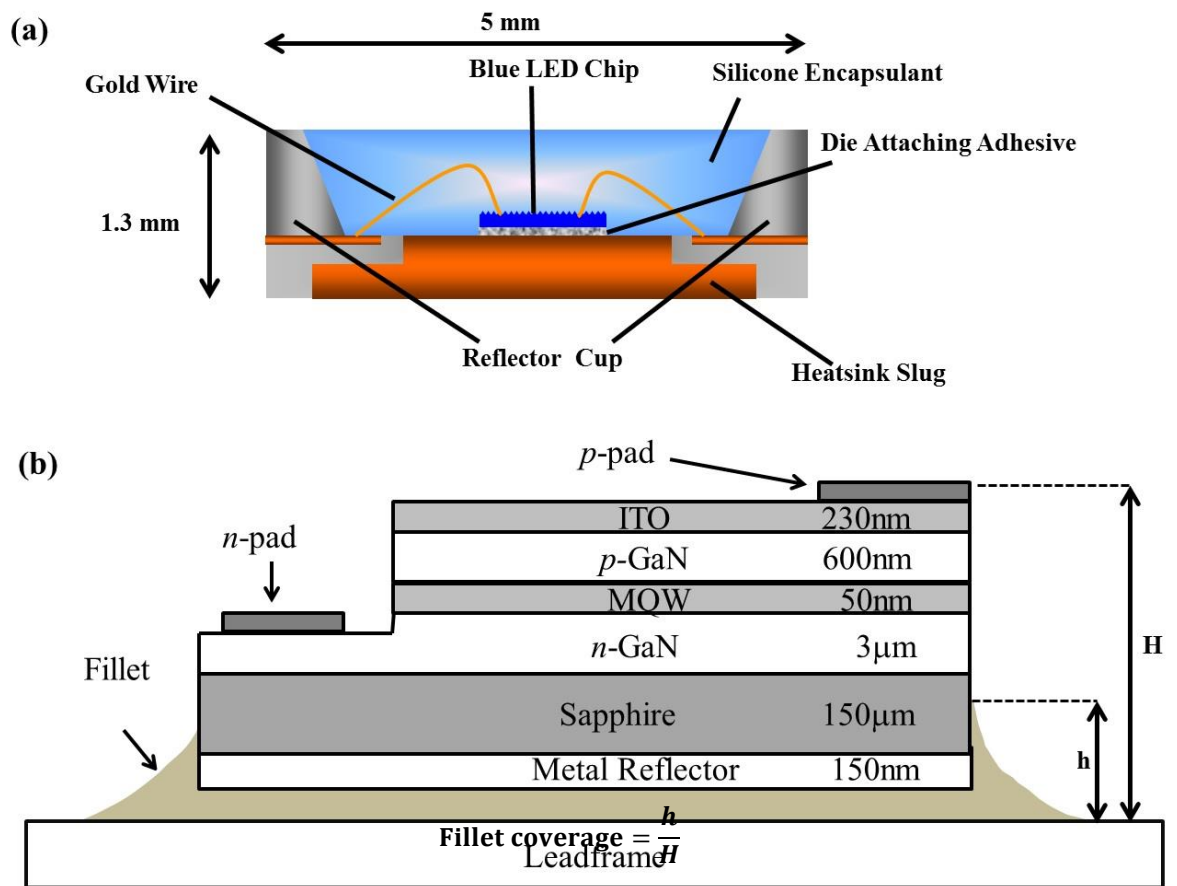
(a) Schematic drawing of a cross-sectional view of a 0.8 W monochromatic blue LED package with pure silicone encapsulant; (b) A macroscopic enlargement of the chip and the DAA layer.
